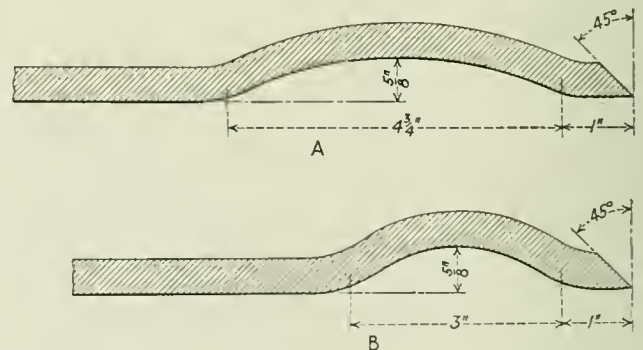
Standard Corrugations for Boiler Sheets and Patches
